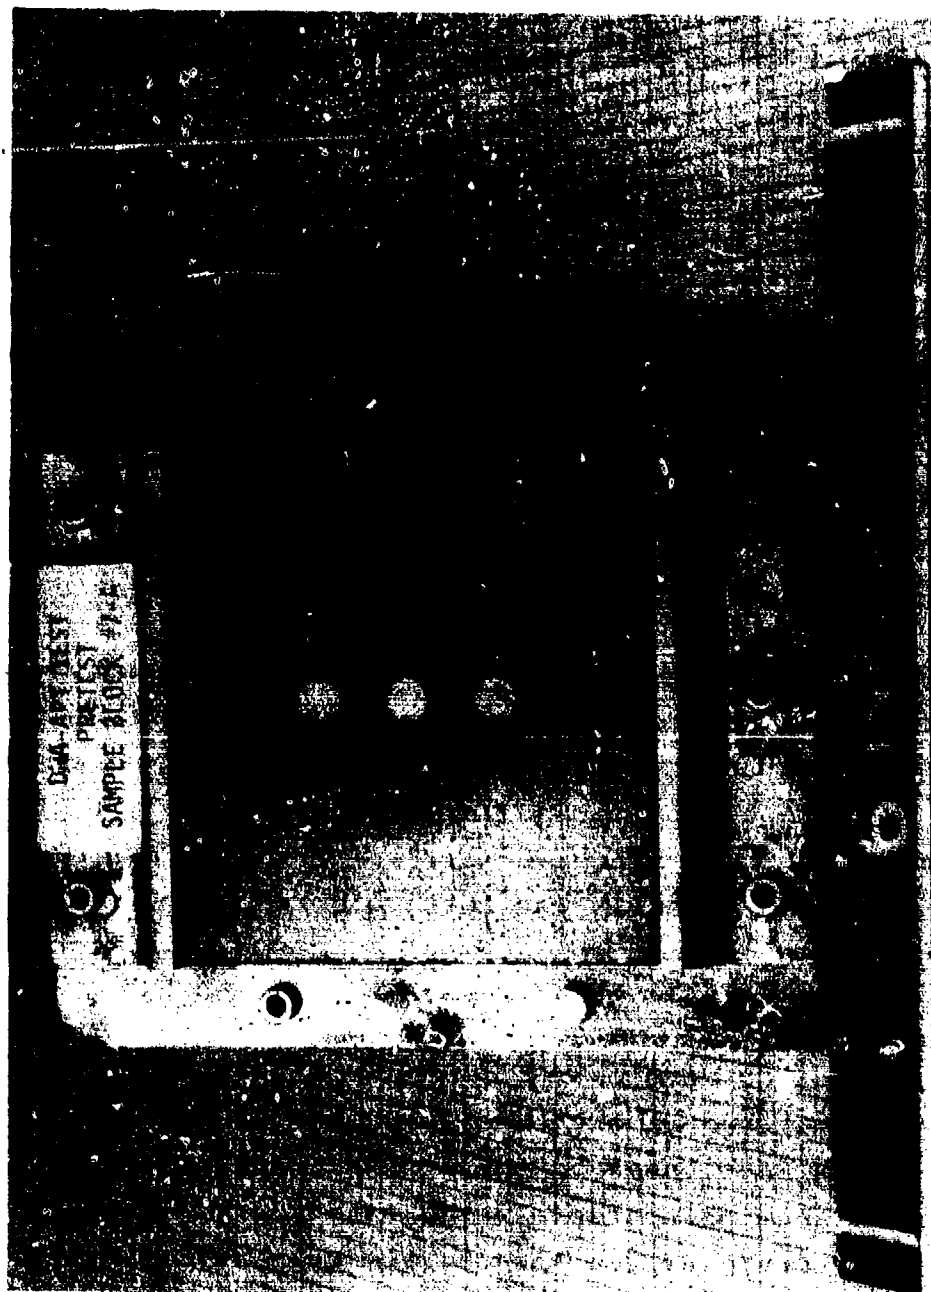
TYPICAL CALIBRATION BLOCK ASSEMBLY
